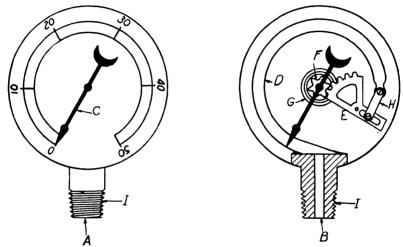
Pressure gauges: A. External view, B. Internal view, C. Needle, D. Bourdon tube, E. Gear sector, F. Pinion gear, G. Hair spring, H. Adjustable link, for calibrating, I. 1/4" pipe threads
